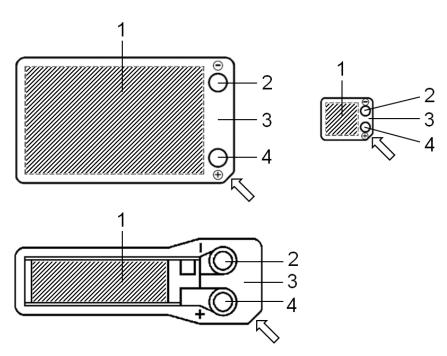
P-876.A1x (top left), P-876.SP1 (top right) and P-878.A1 (bottom)
